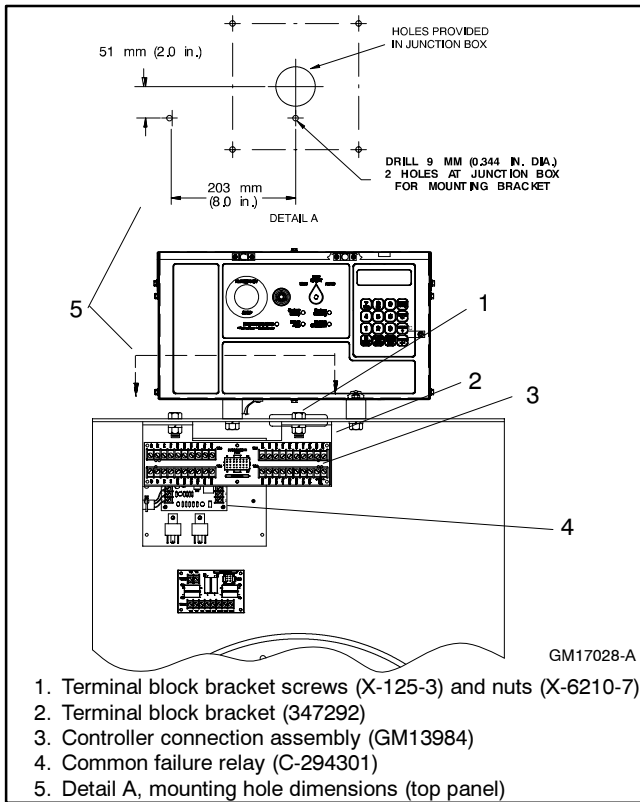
Terminal Block Bracket and Controller Connection Assembly Mounting (350/400 kW)
